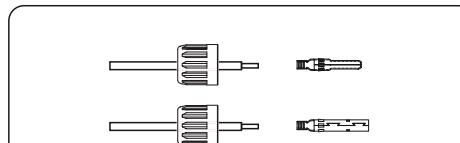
Insert the Wire into the Connector Cap nut and contact pin
